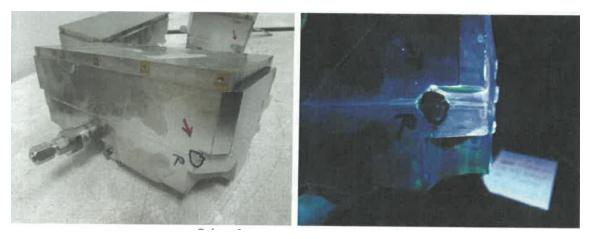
Crack Indications on Tank Weld Line during Dye-Penetrant Inspection
